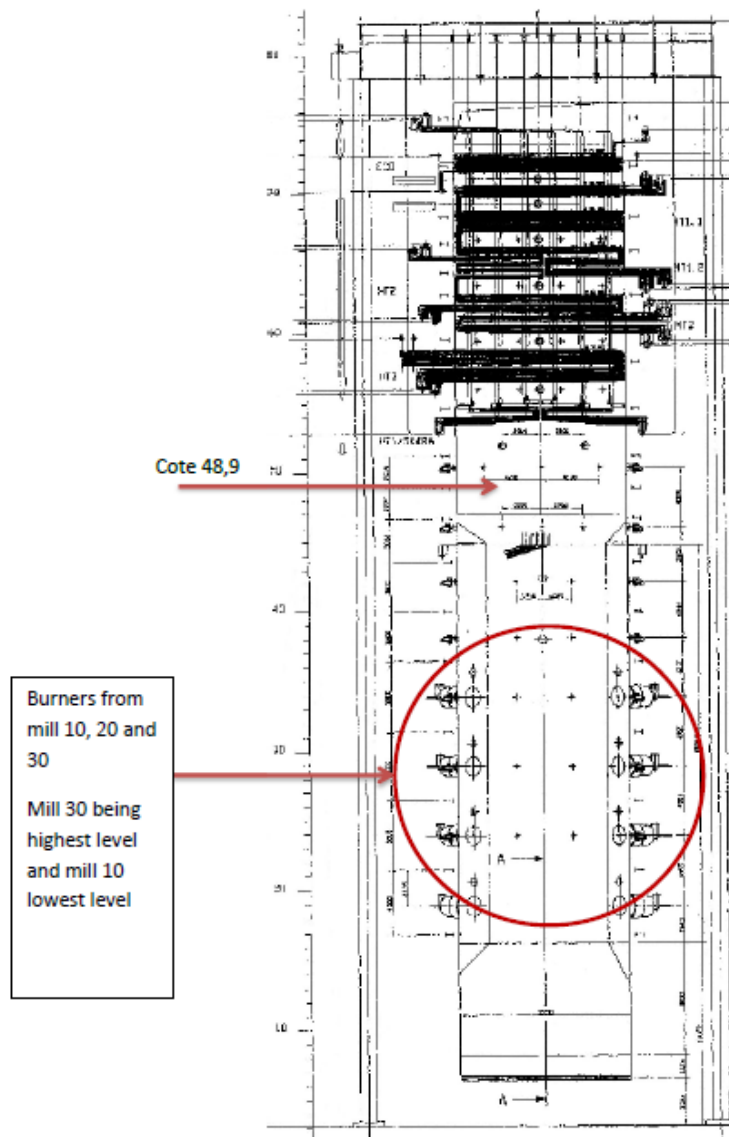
Drawings of AVV2 boiler with identification of probe measuring position [5].
